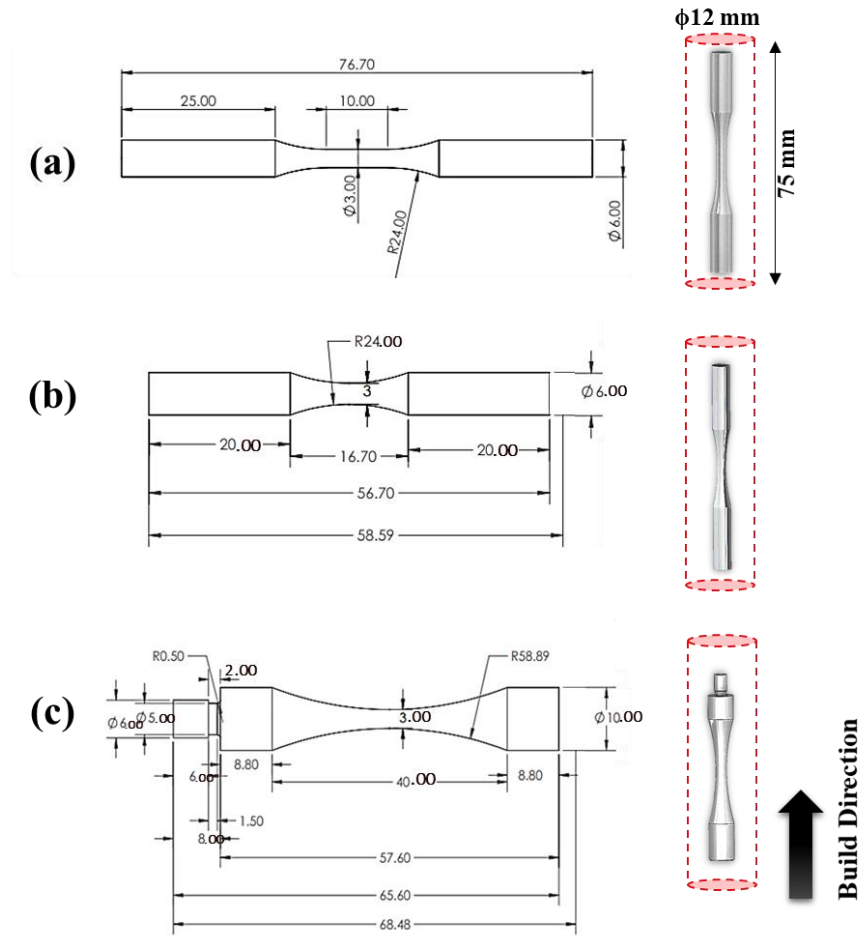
The geometry of fatigue specimens: (a) uniform gage, (b) hourglass and (c) ultrasonic specimens. All the dimensions are in mm.
